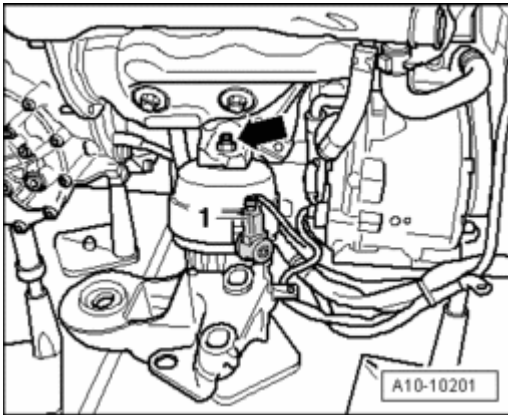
Disconnecting Electrical Connector & Removing Nut And Right Engine Mount
